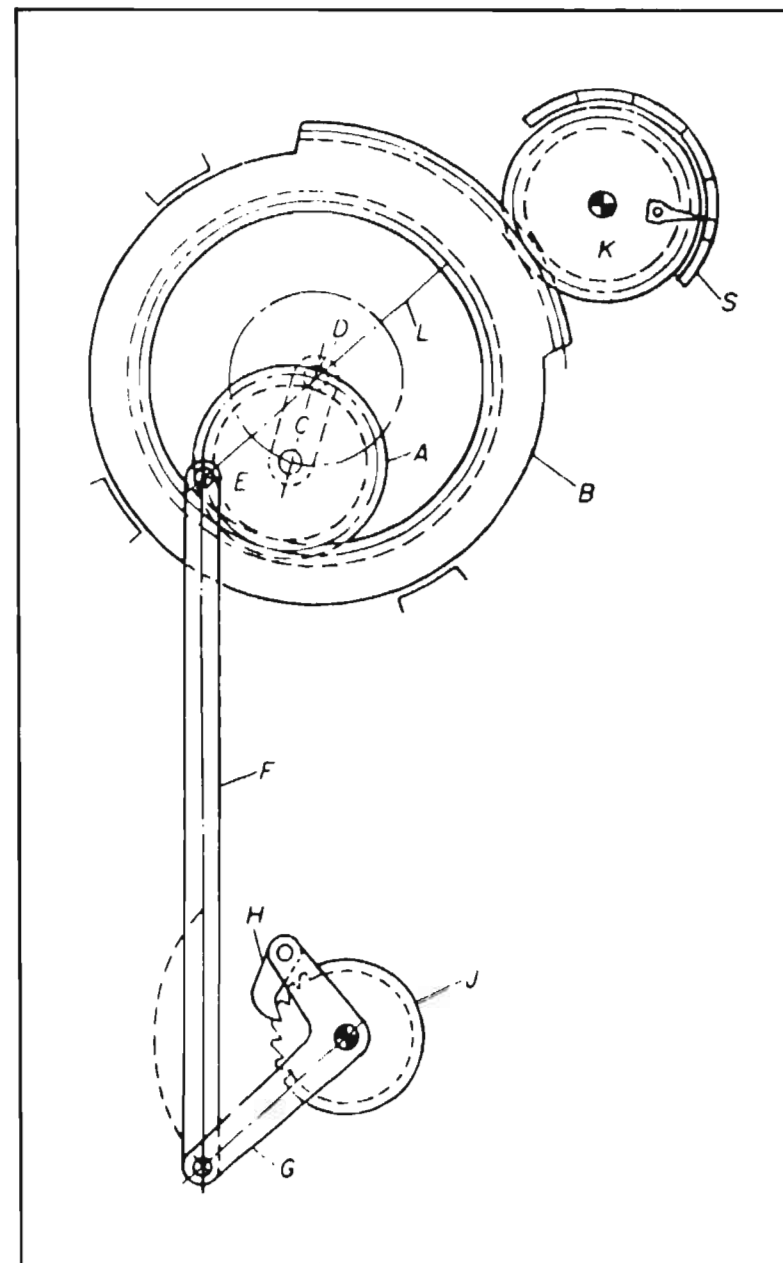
An adjustable indexing mechanism with 180 degrees of dwell.
